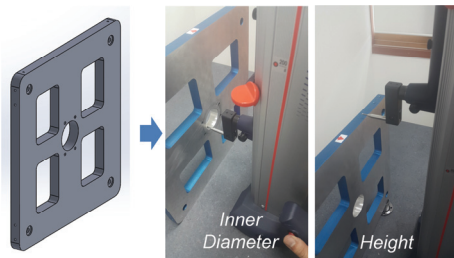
Measurement of part dimensions by linear height (GUIDE PLATE).
